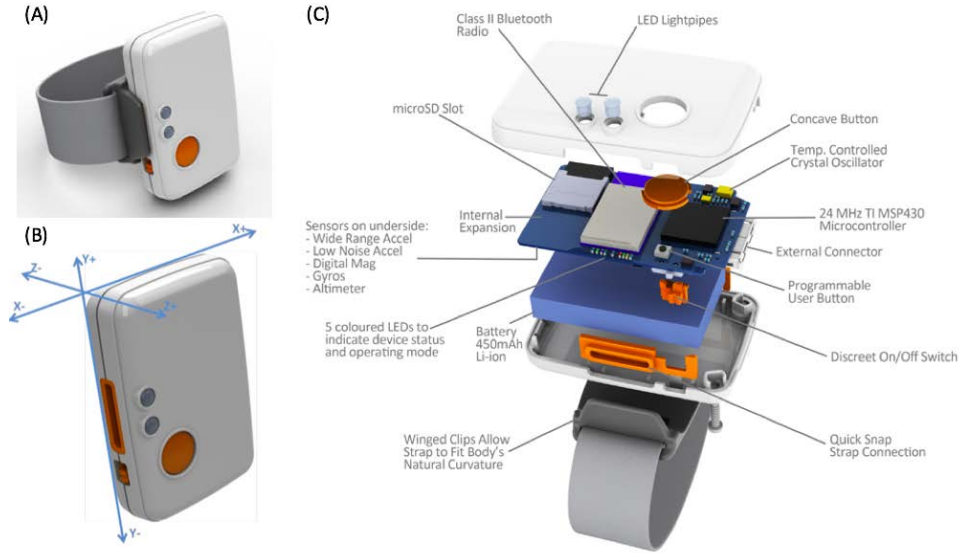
Shimmer3 IMU: (A) enclosed module, (B) default axis position, (C) exploded view showing individual components.
